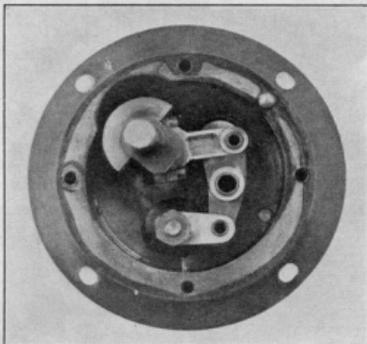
Operating Mechanism for Oscillating Mirror Assembly
